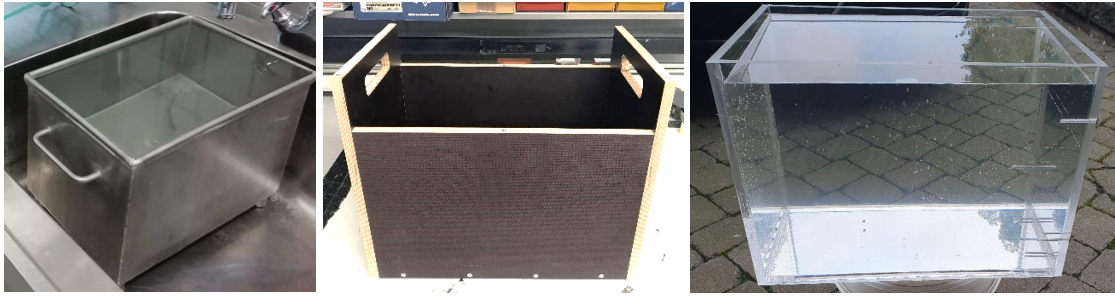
From left to right: metal mold1, wood mold2, plastic mold3.
